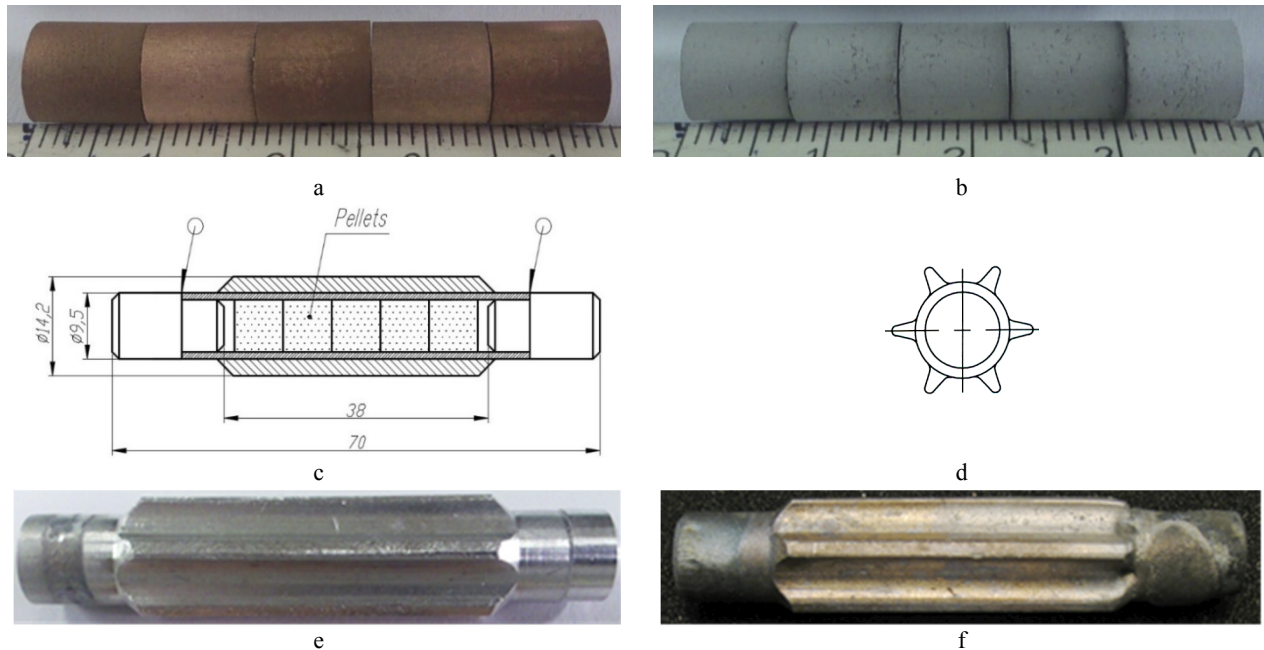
Fuel rod dummies before and after HIP treatment: a, b – pellets of dispersion composition HfO₂-Al with copper and silumin coatings; c, d – design of fuel rod dummy; e, f – appearance of the dummy workpiece and fuel rod dummy before and after HIP treatment
